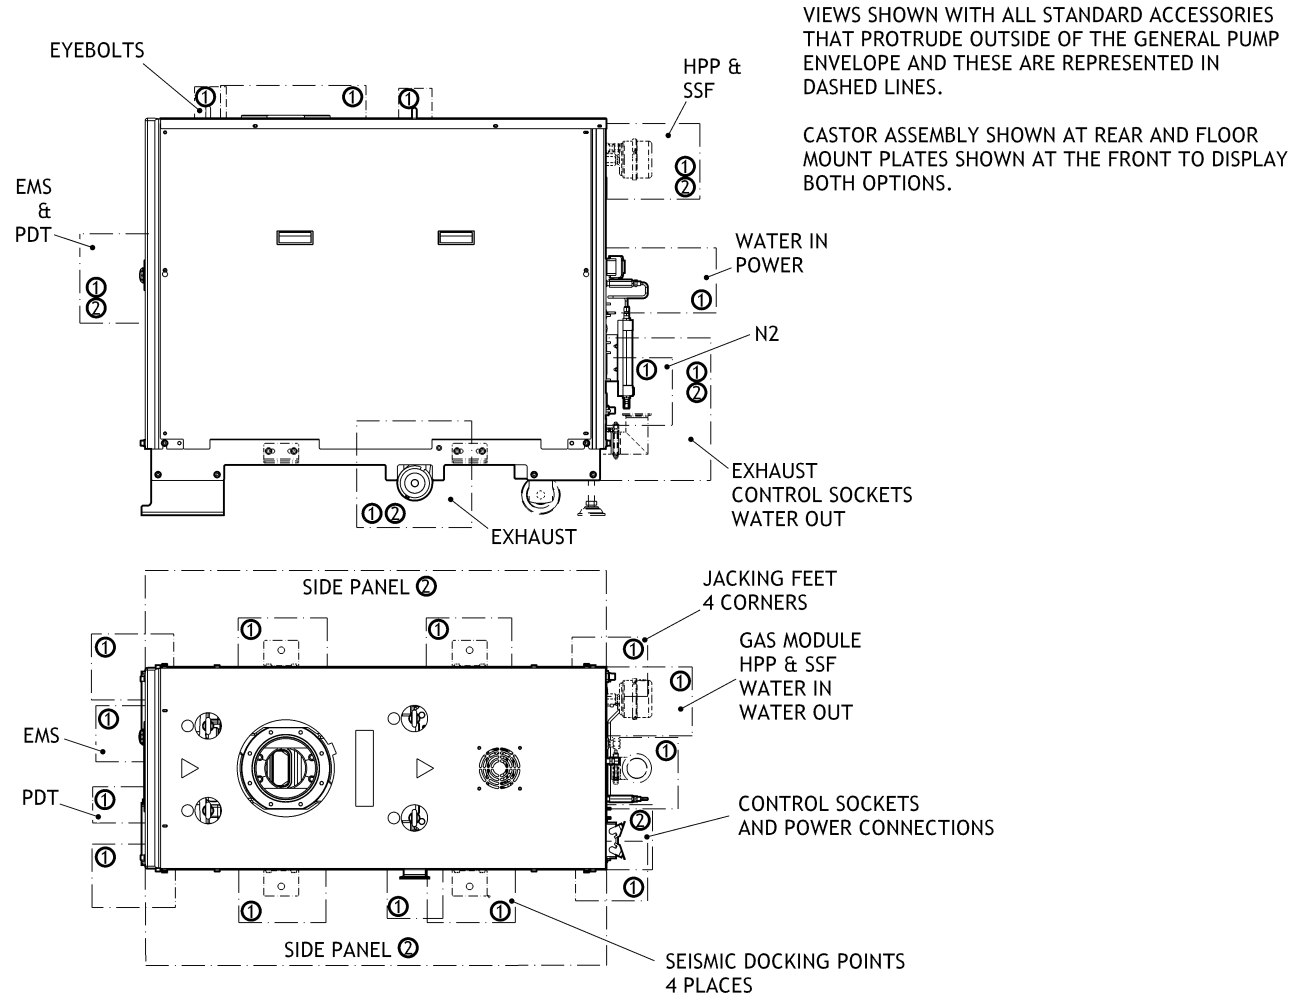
GXS450/2600 installation drawing (Sheet 3)
